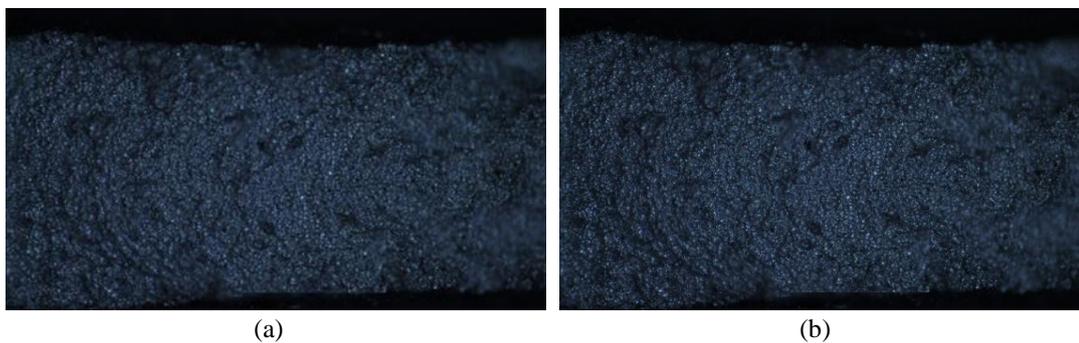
Morphology of fracture: (a) The fracture surface is ductile, (b) The broken surface is less ductile
